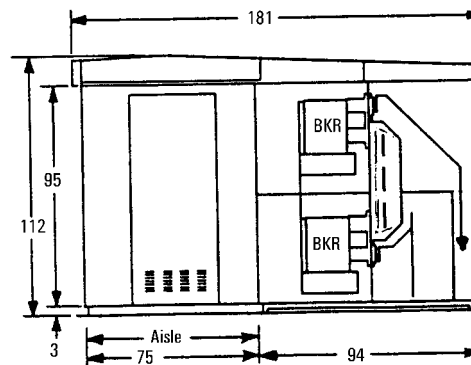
Typical Section Dimensions—Outdoor Protected Aisle Equipment (All dimensions in inches)
